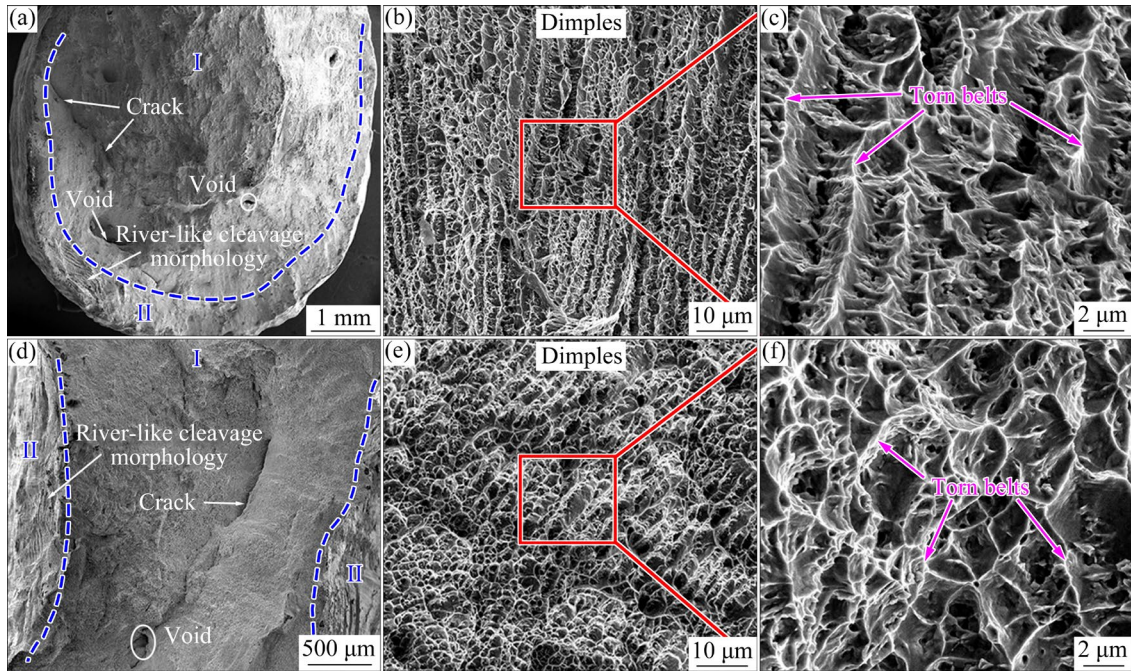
Fracture morphologies of HW-LMD Inconel 625 tensile specimens: (a–c) In x direction; (d–f) In y direction
